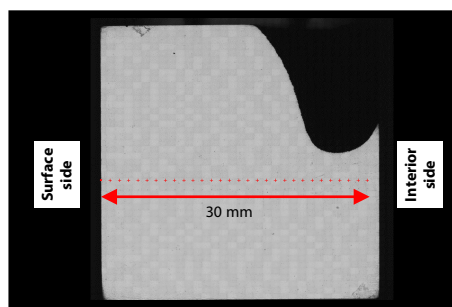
View of Test Specimen Taken Using the Stage Viewer Function
